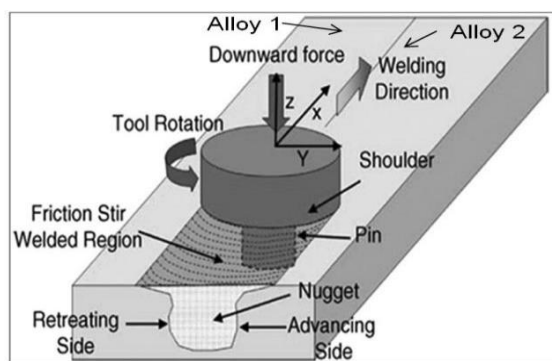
Friction stir welding arrangement (Source: Sundaravel Vijayan et al. 2010)
